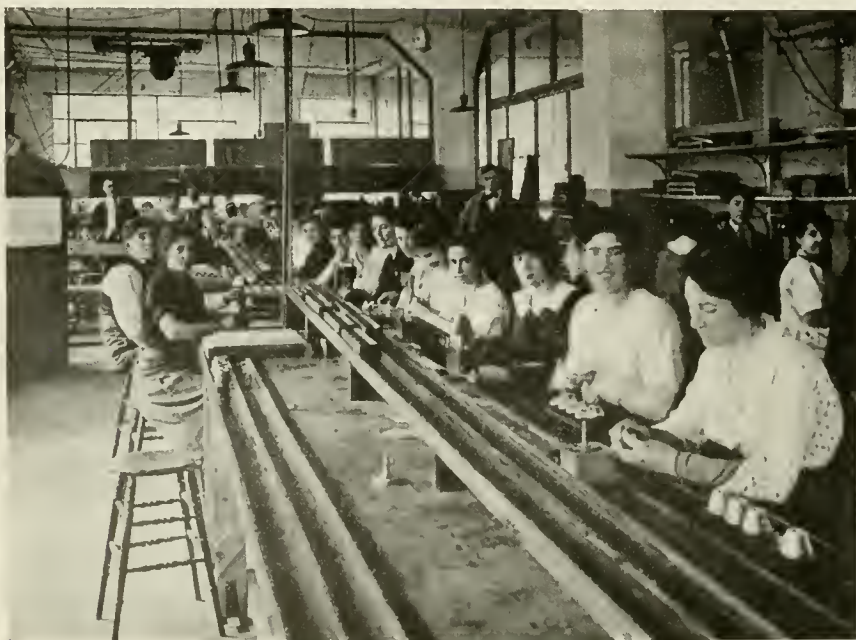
FUSE ASSEMBLY DEPARTMENT.
